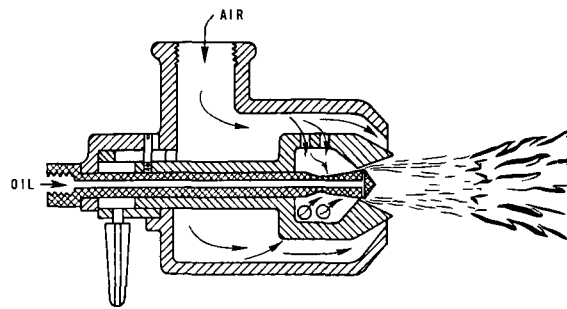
LOW-PRESSURE, AIR-ATOMIZING OIL BURNER (HAUCK MANUFACTURING CO., 1953)
